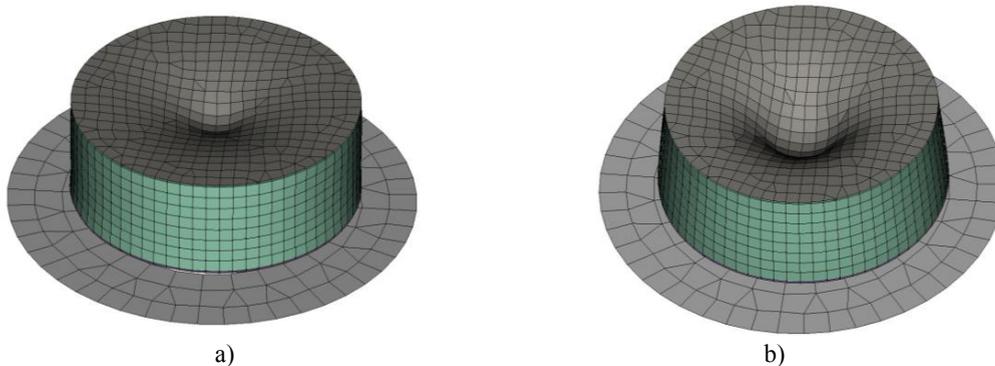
Deformed shapes of two polyurethane foam sandwich specimens
